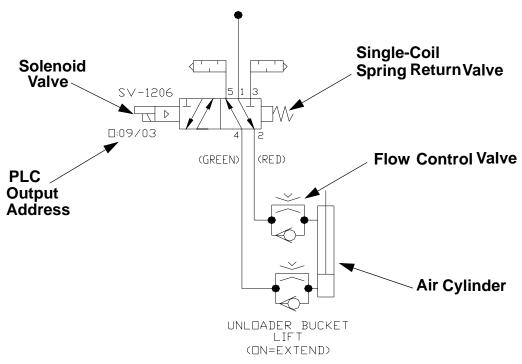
Single Solenoid Valve on Pneumatic Drawing
